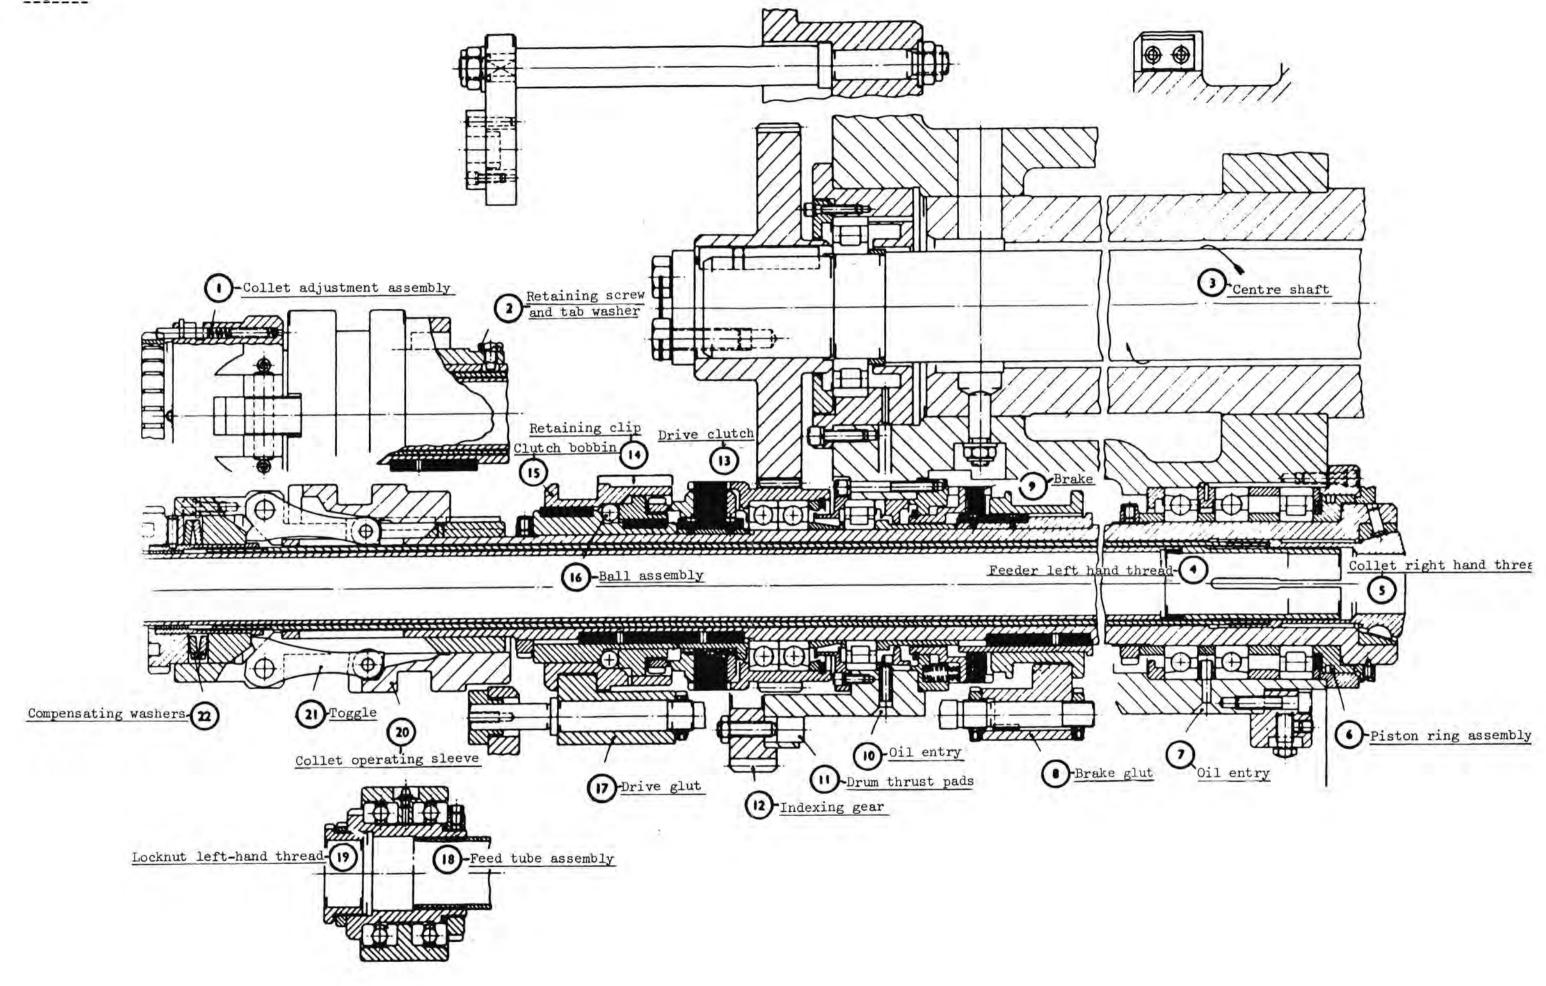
shows the spindle drum assembly; each spindle gear is driven from the central gear and runs loosely on ball bearings when the multi-plate brake is engaged. The brake contains a series of preloaded cus hion springs which limit and maintain the brake torque and is sufficient to brake the spindles to a standstill.
